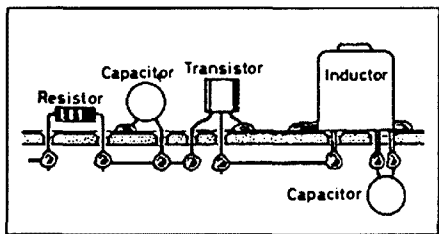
Wired-track RF construction, using a single-sided board, copper side uppermost. (Courtesy RadCom).
